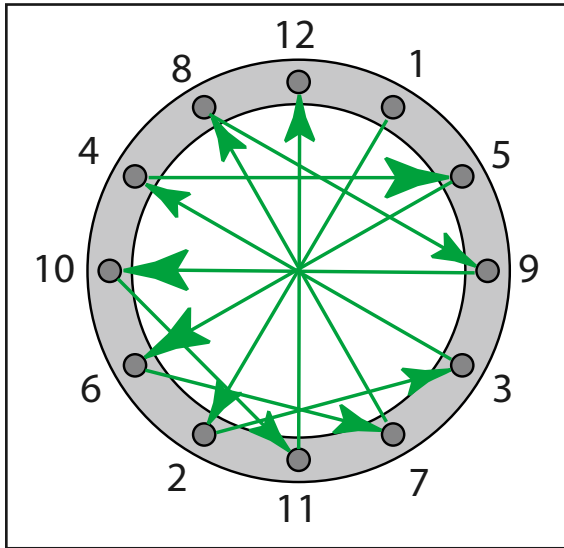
Tightening pattern of 7/8-inch nuts for heating coil assembly flange.
